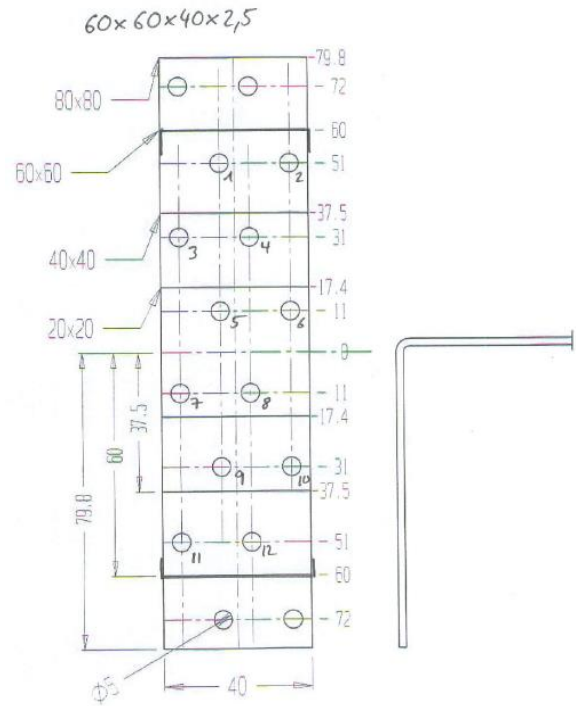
Dimensions of angle bracket 60x60x40x2,5
